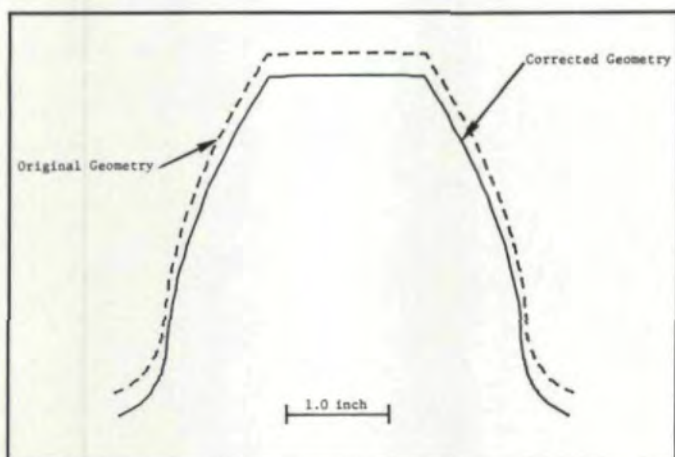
Computer Program Display of the Original Gear Tooth and the Corrected Gear Tooth Geometry
